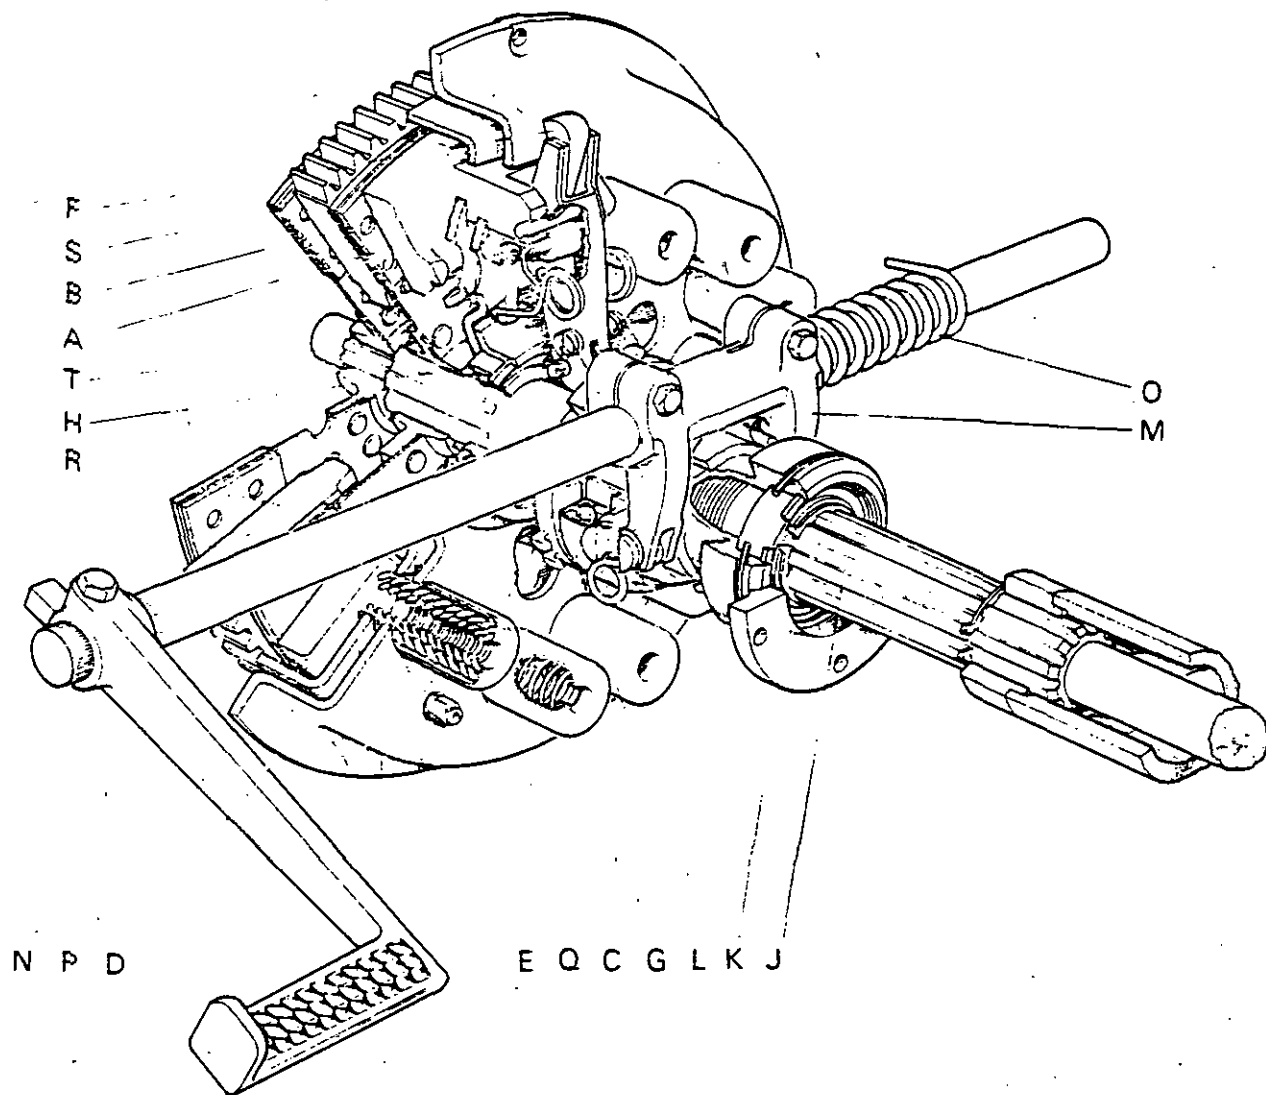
DOUBLE CLUTCH — 770 TRACTOR
